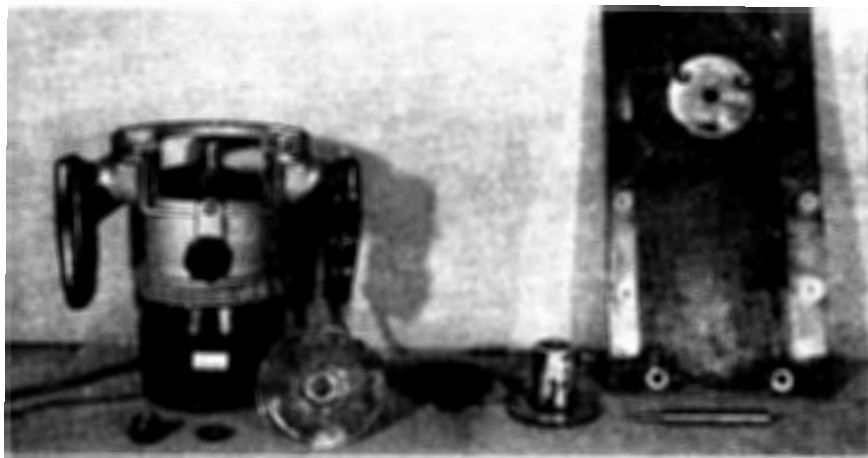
VARIOUS COMPONENTS OF THE DISC DRIVE ASSEMBLY
